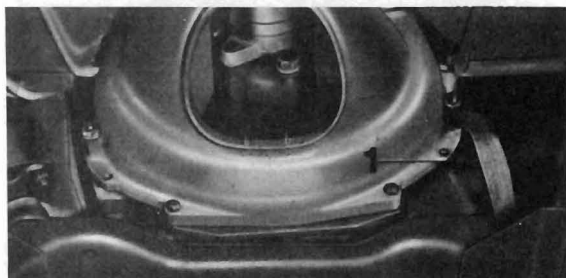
Flywheel housing earth strap (1) (Sec 11)
